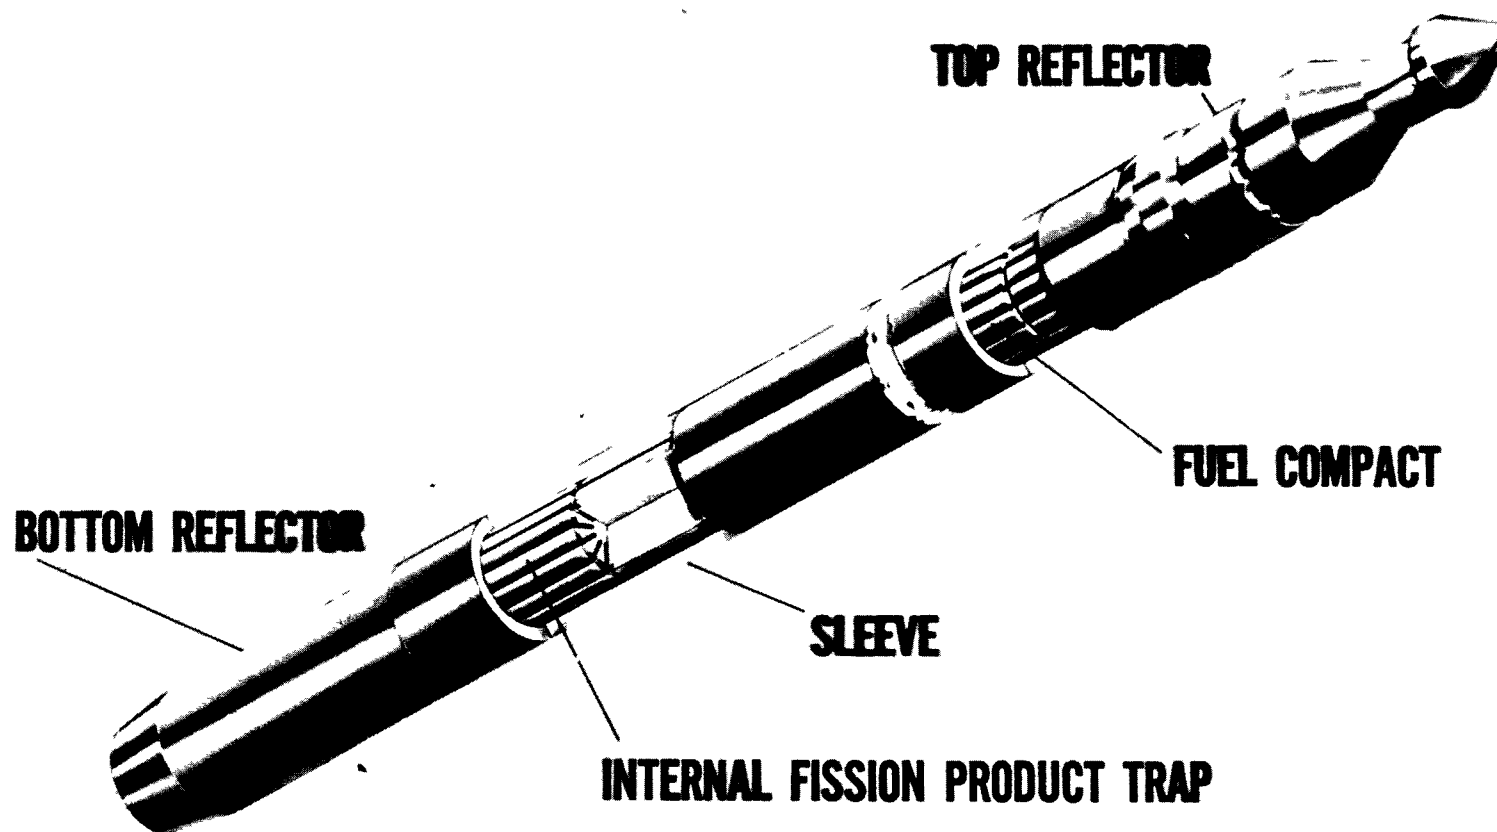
Cutaway View of Peach Bottom Fuel Element
